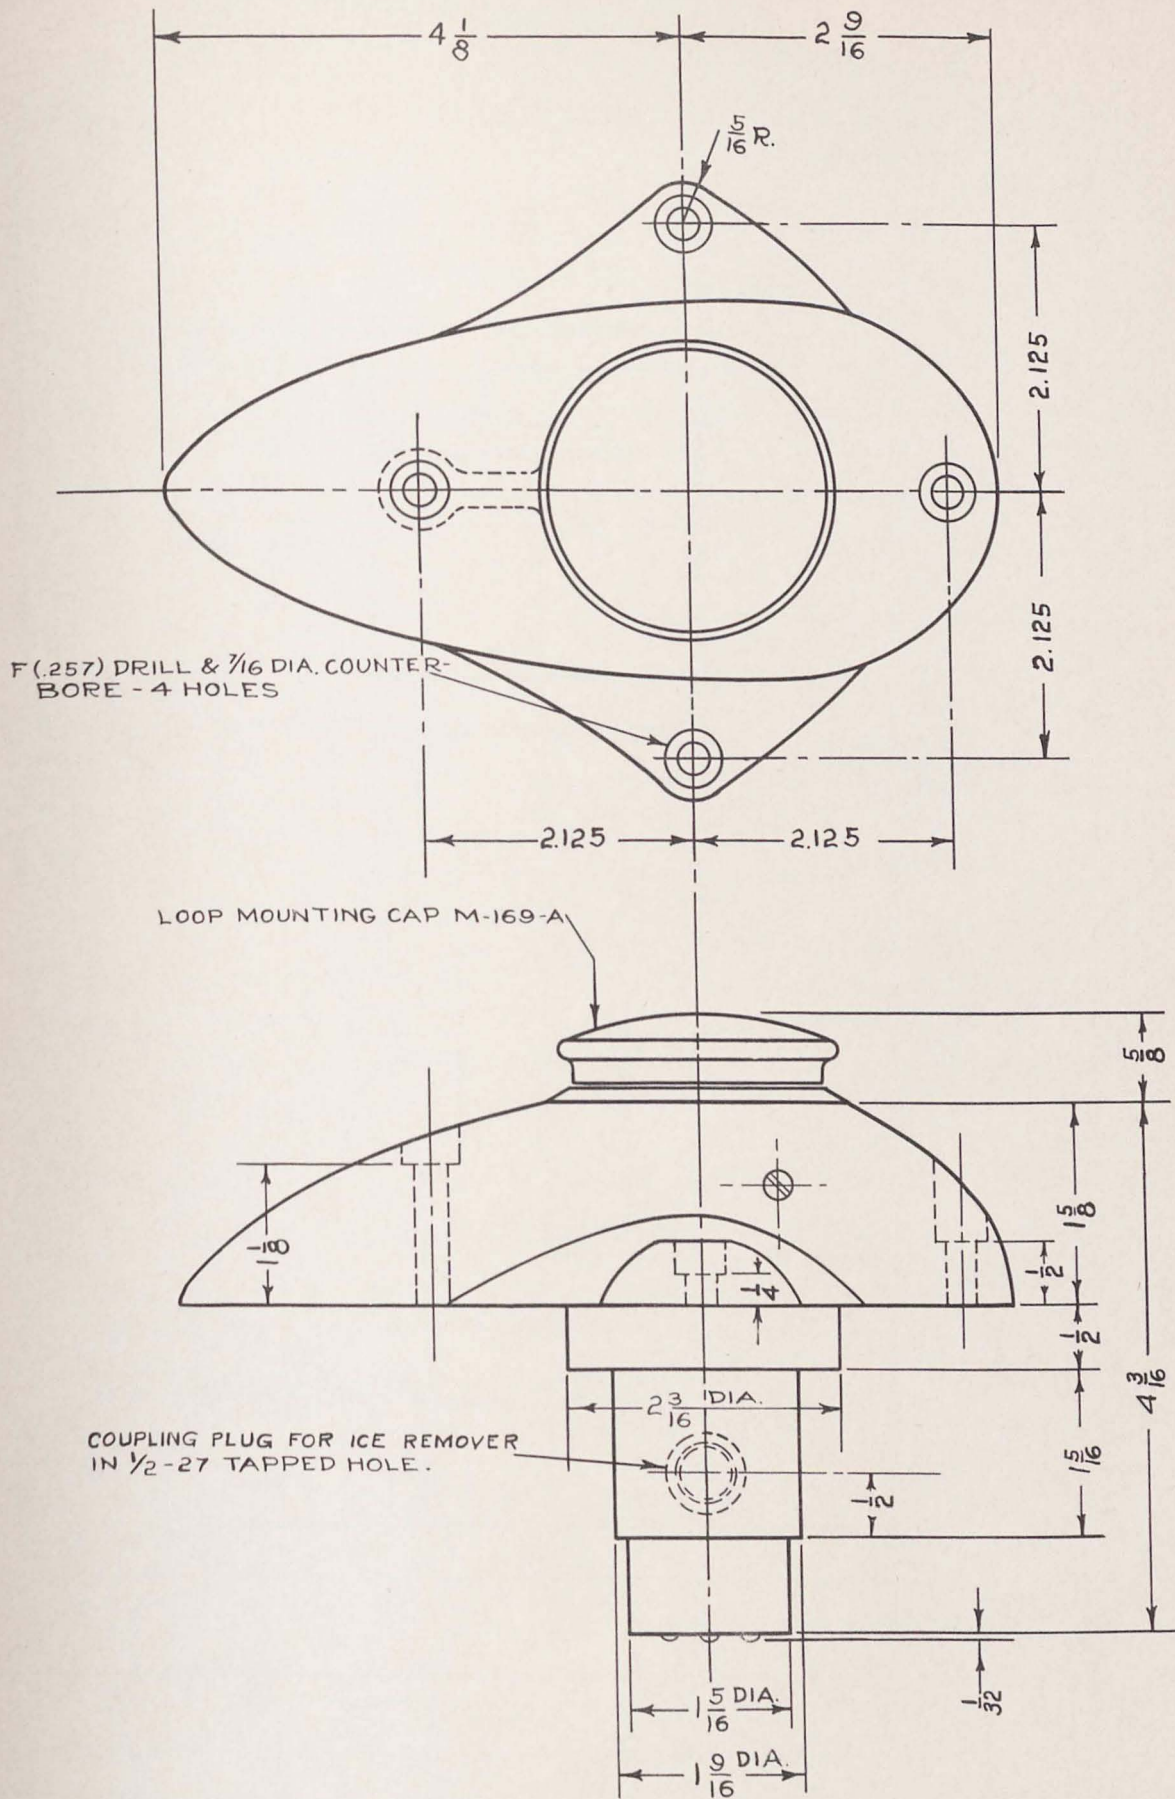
Loop Mounting GS-7-A, Outline Dimensional Drawing
